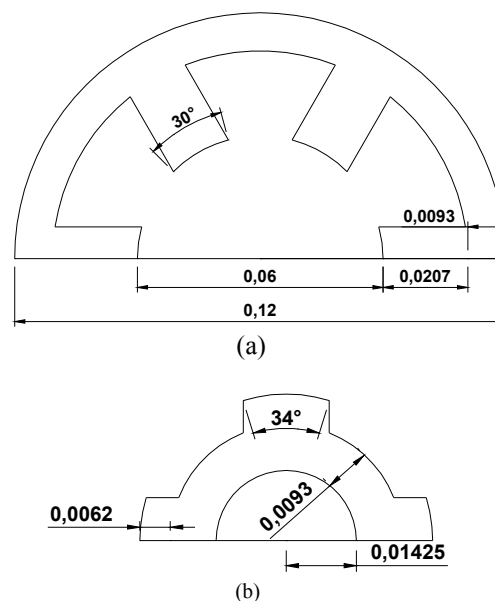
SRM structure: (a) Stator dimensions (mm) and (b) rotor dimensions (mm)
